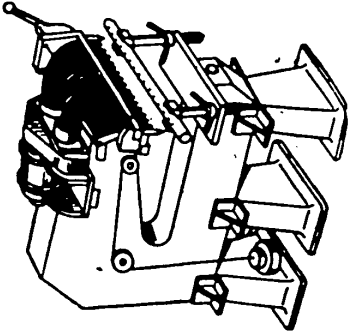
shows a drill stand with a twelve-spindle drill head. The head is fastened to the stationary part of the stand on the spindle end (1). From the electric motor the rotary motion is transmitted over the driven tapered block (2) and the clutch (3) to the crankshaft (4) and dog (5). The dog (5) then imparts a rotary motion to the spindles (7) of the head. In order to prevent dynamic unbalancing, the dog is provided with a counterweight (6) on the crankshaft. This kind of a head makes it possible to drill holes in components and in parts at a continuous pace.
